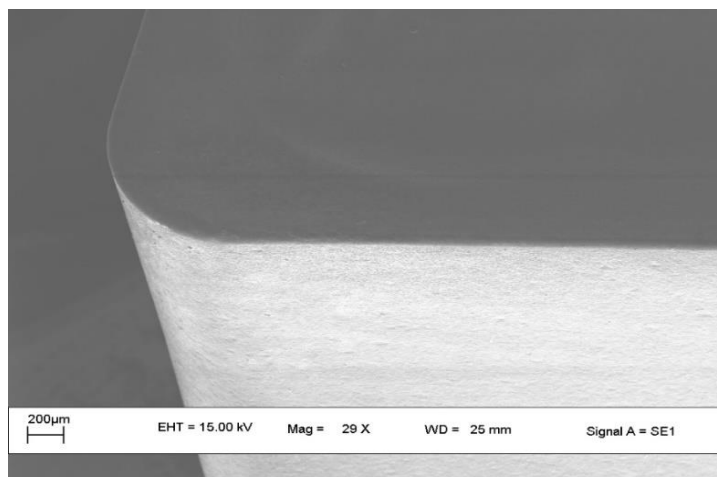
Initial tool geometry of the flank face in cutting tool
